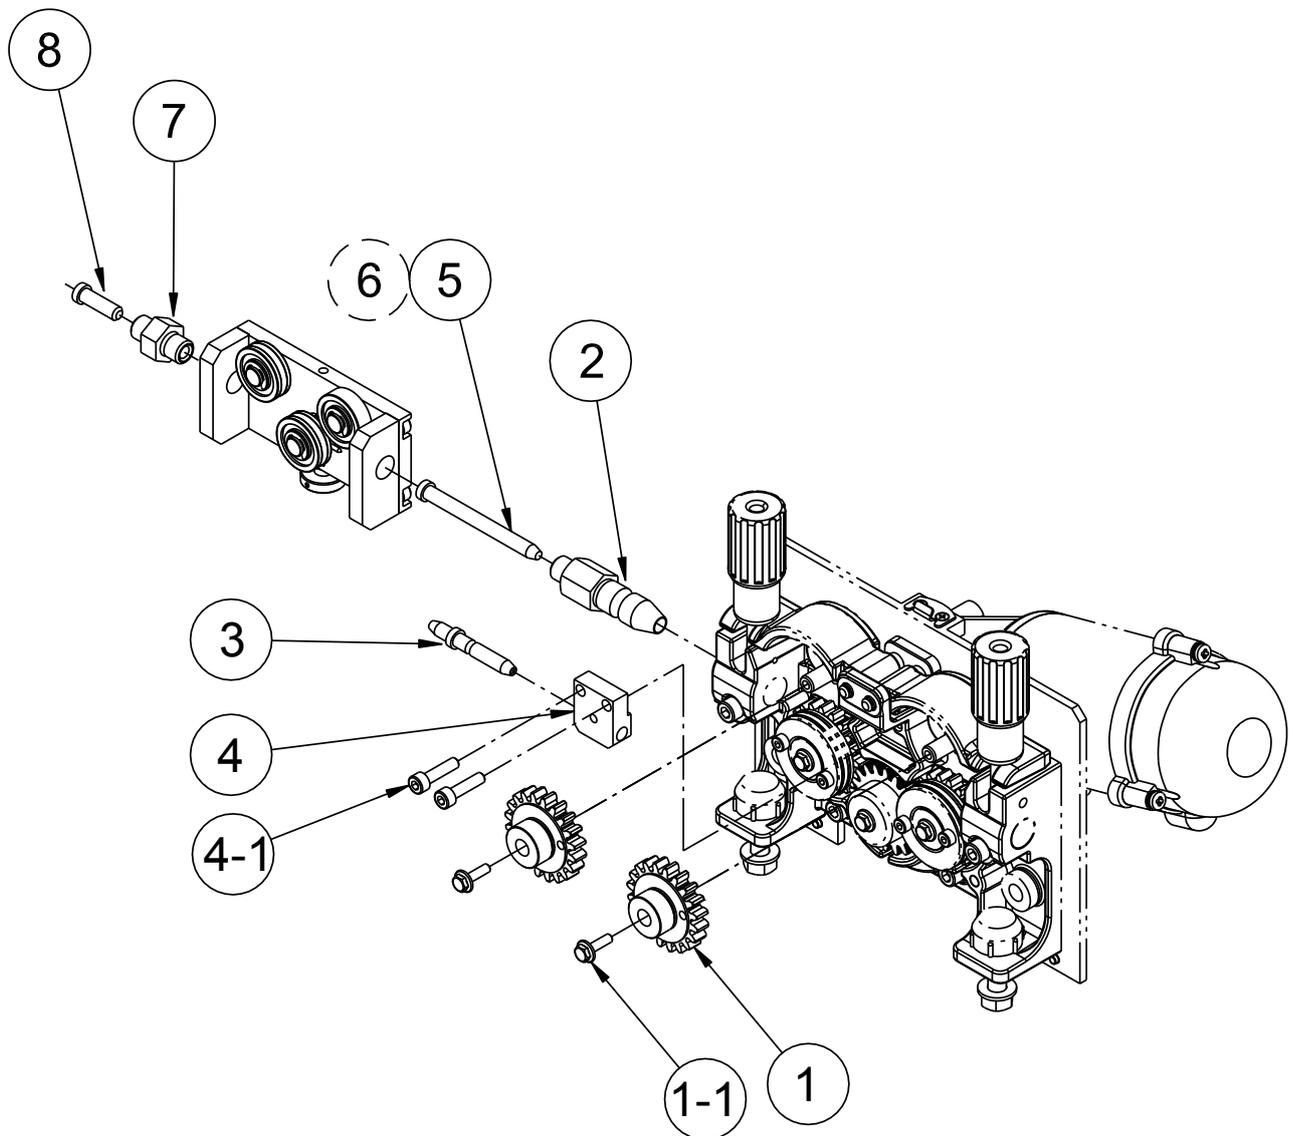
Exploded diagram of assembly parts (L10596C00)
